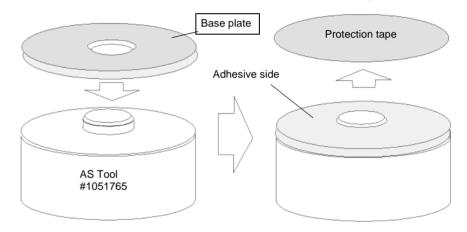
Setting the Base plate on the AS Tool # 1051765
